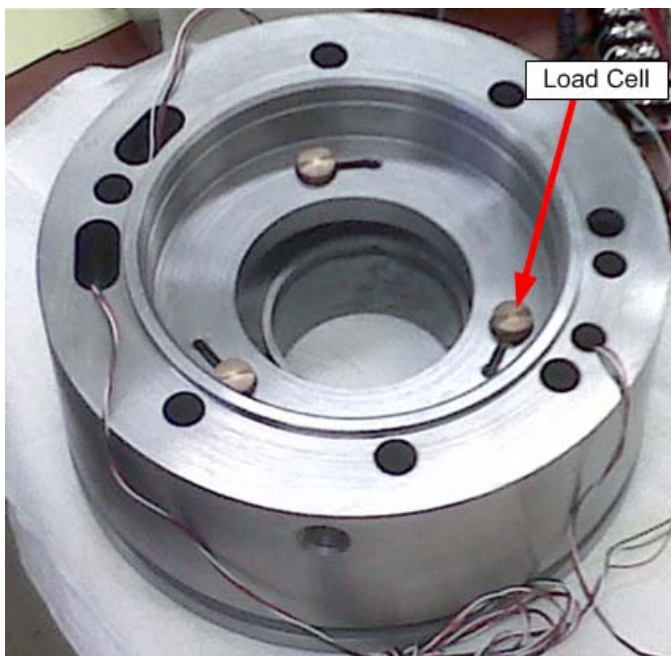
Redesigned Thrust Bearing Housing Showing Distributed Load Cells
